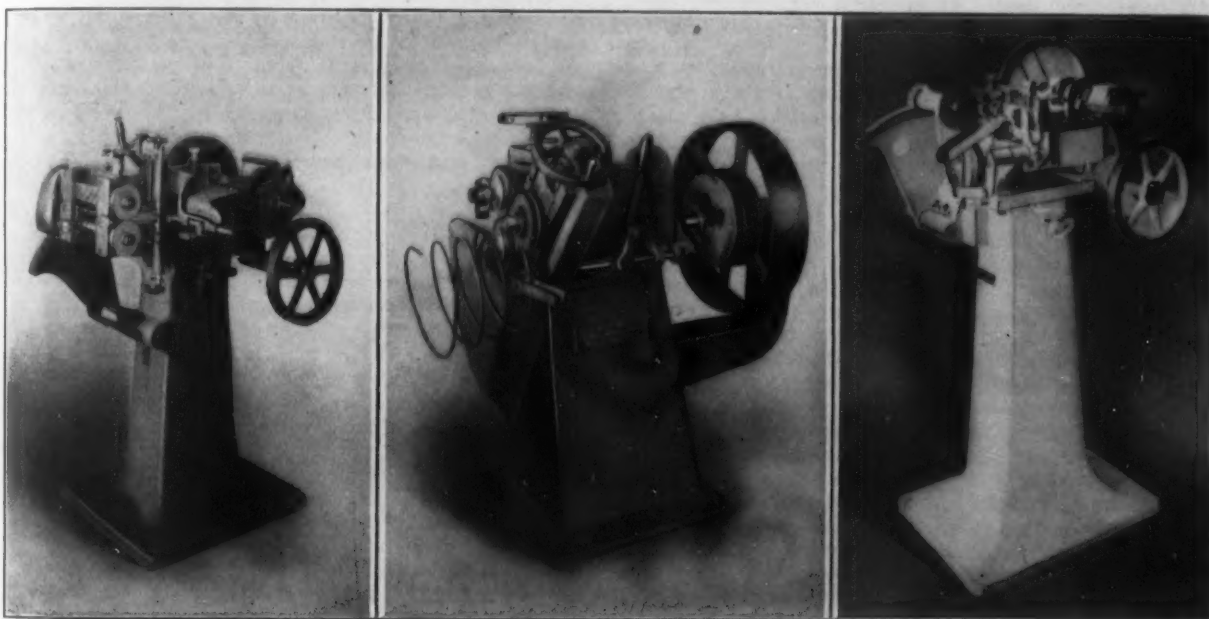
Spring Coiling and Cutting Machine. Fig. 2.—Continuous Spring Coiling Machine. Fig. 3.—Spring Winding and Cutting Machine.
